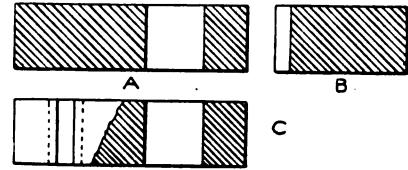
A—LENGTHWISE SECTION DRAWING OF BLOCK. B—TRANSVERSE SECTION. C—SECTION AND ELEVATION IN COMBINATION.
